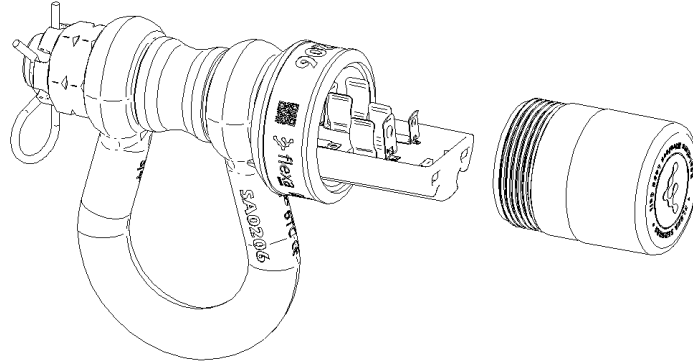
Shackle Load Cell – PCB enclosure opening
